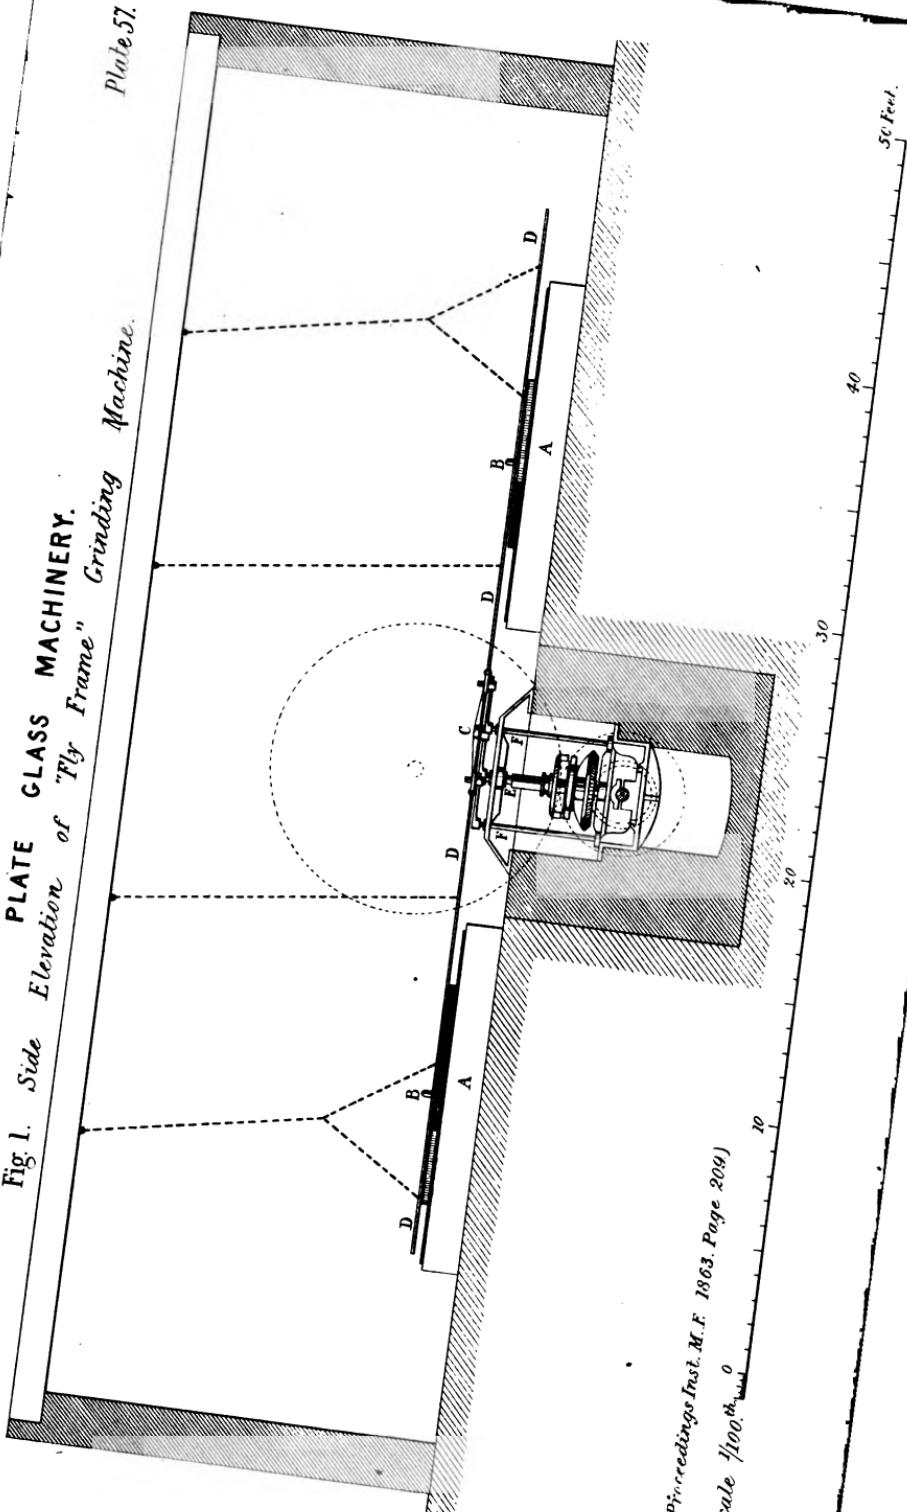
Side Elevation of "Fly Frame" Grinding Machine.
